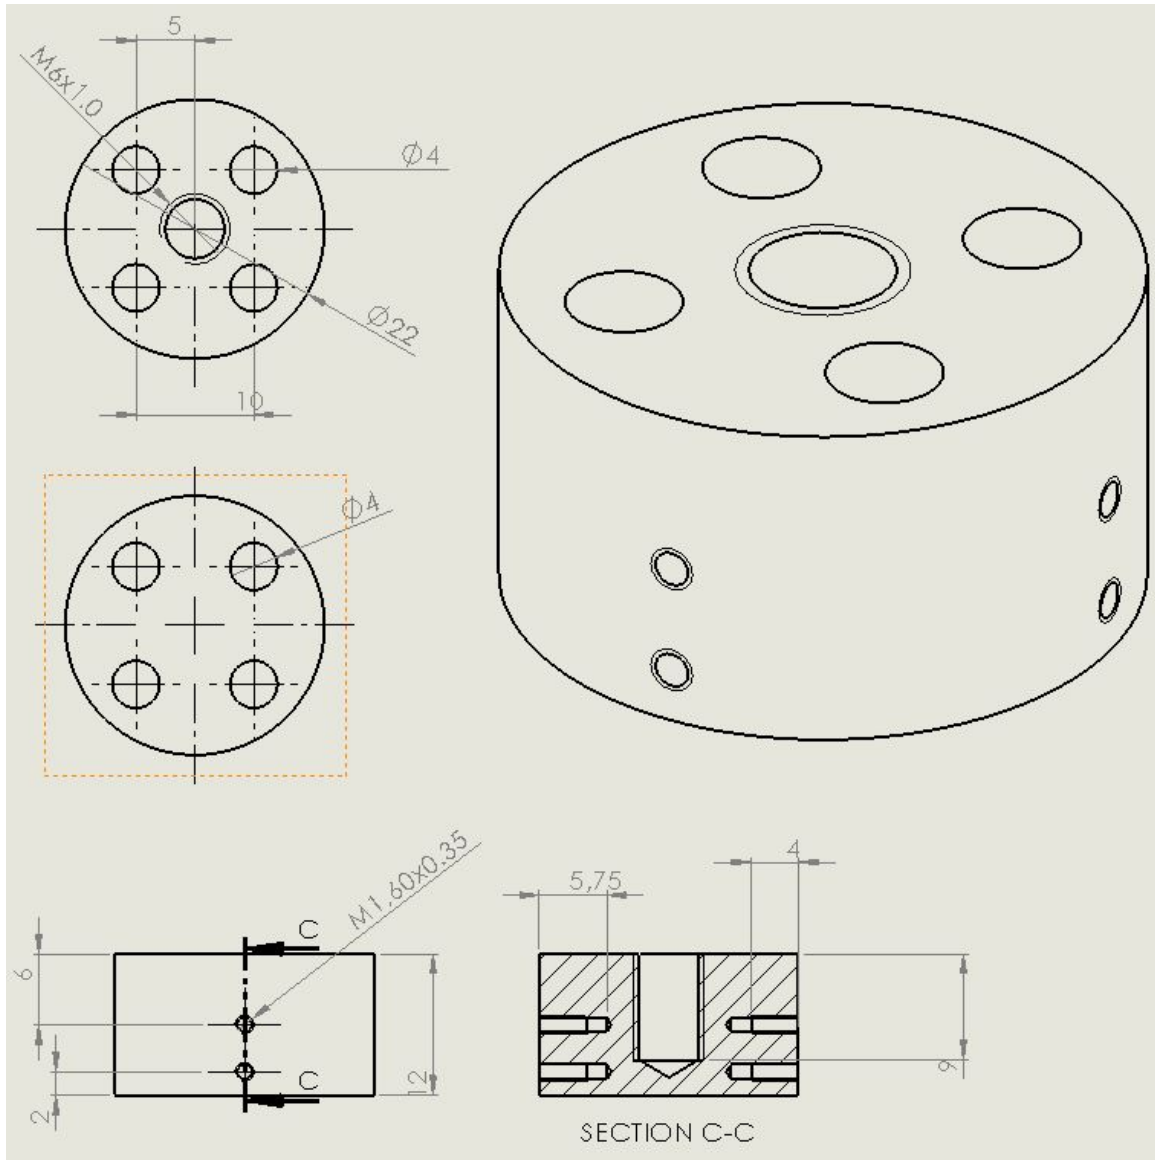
Solidworks model drawing of the upper plate of the outer frame of the cryostat holder
